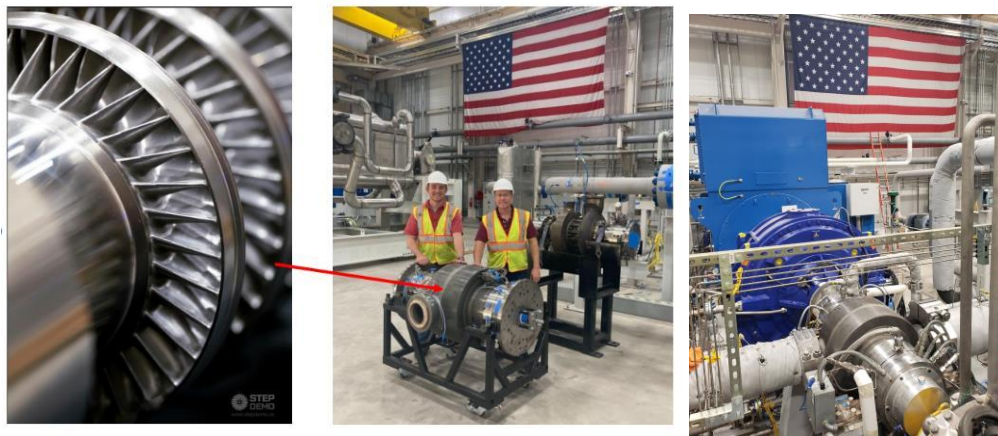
Turbine rotor, assembled turbine and fully assembled turbine train.
